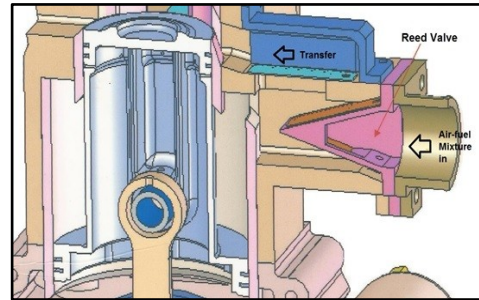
Engine sectional view showing intake, piston, void and transfer port.
